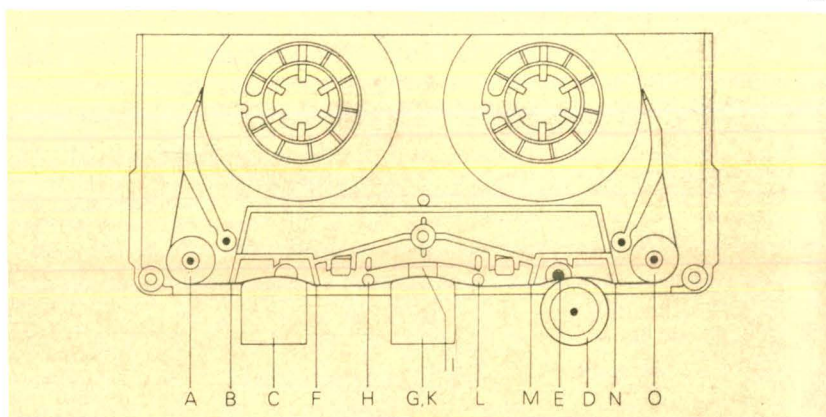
Tape path and C-O components. A = left roller and axle; B/F = left stay guides; C = erase head; D = pinch wheel; E = capstan; G/K = record/play head(s); H/L pin guides; I = pressure pad and spring; M/N = right stay guides; O = right roller and axle.
